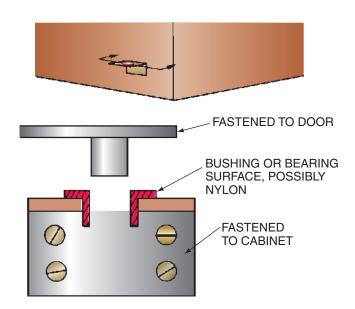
Hinges may have bearing surfaces to make door opening easier.
